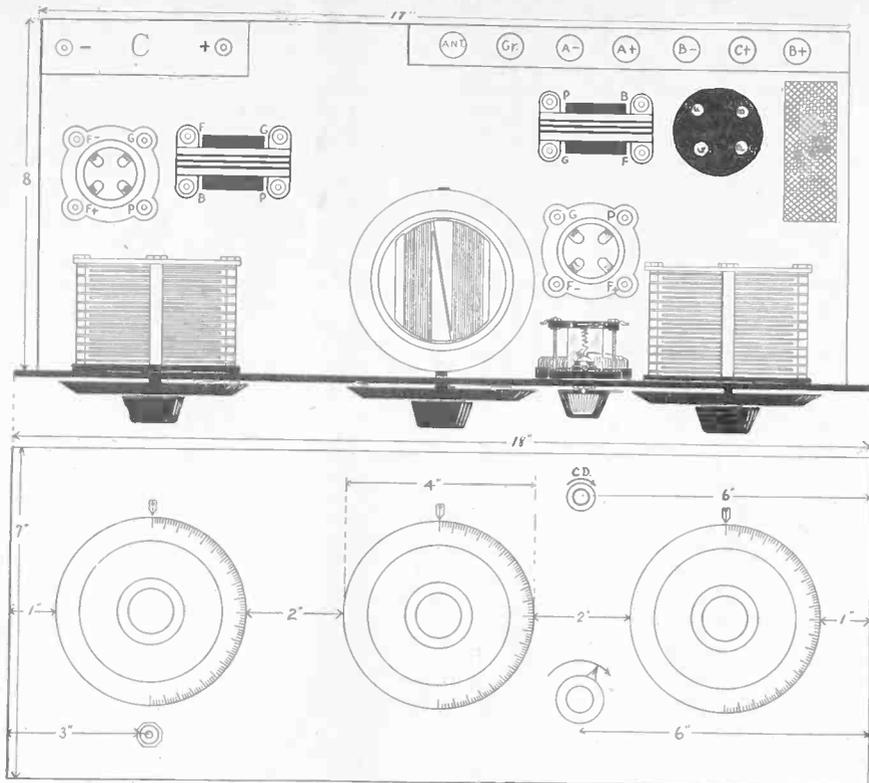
, combined panel layout and assembly plan for the Bluebird Reflex.
